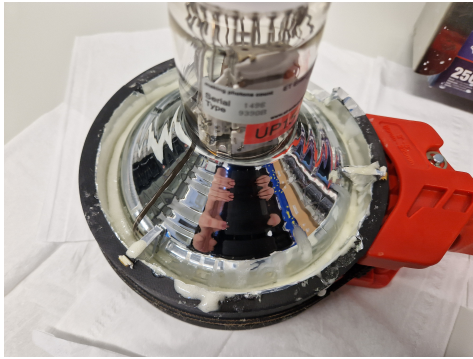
PMT foam sealing inside mold. The foam layer for the top PMT contains a sealed in straw to pour in the PFPE after the inner assembly is sealed in.
